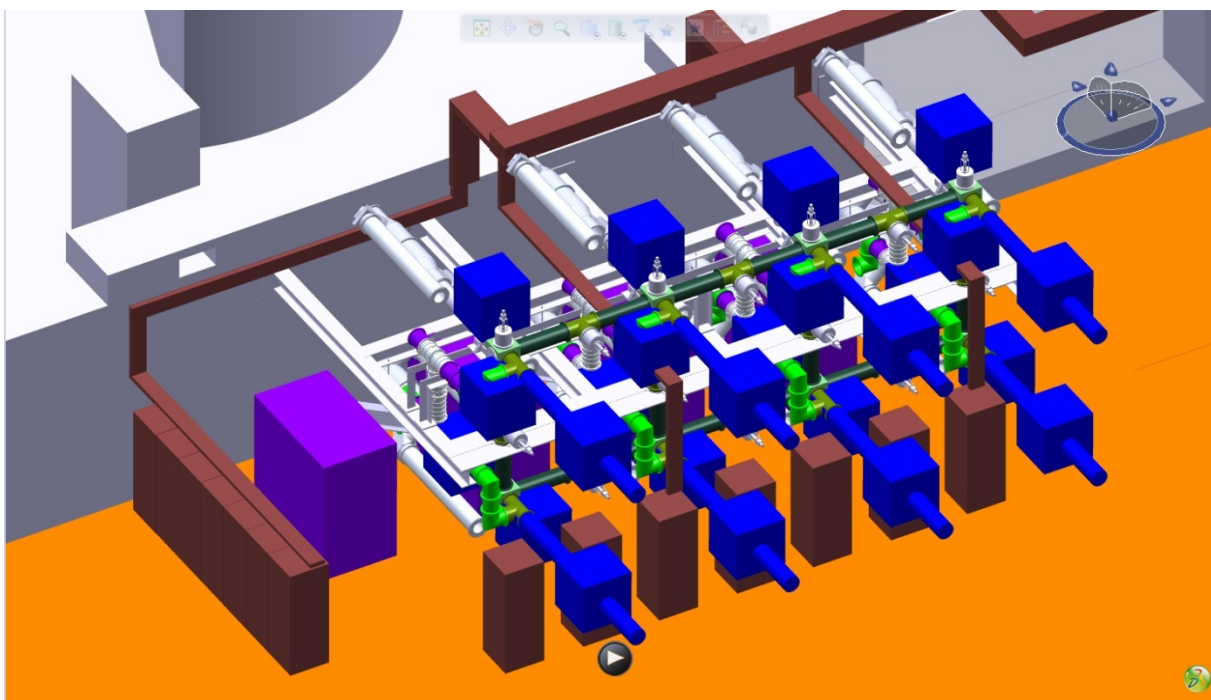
IC H&CD matching units in Assembly hall: foot print is approximately 11m x 13m.
